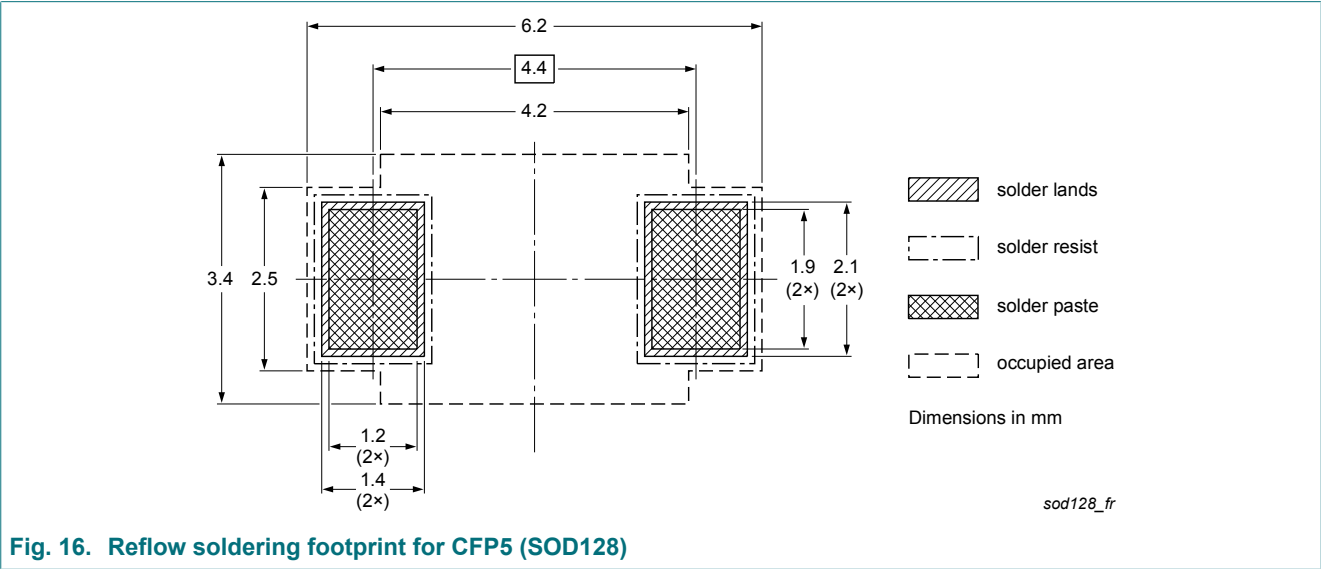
Reflow soldering footprint for CFP5 (SOD128)
